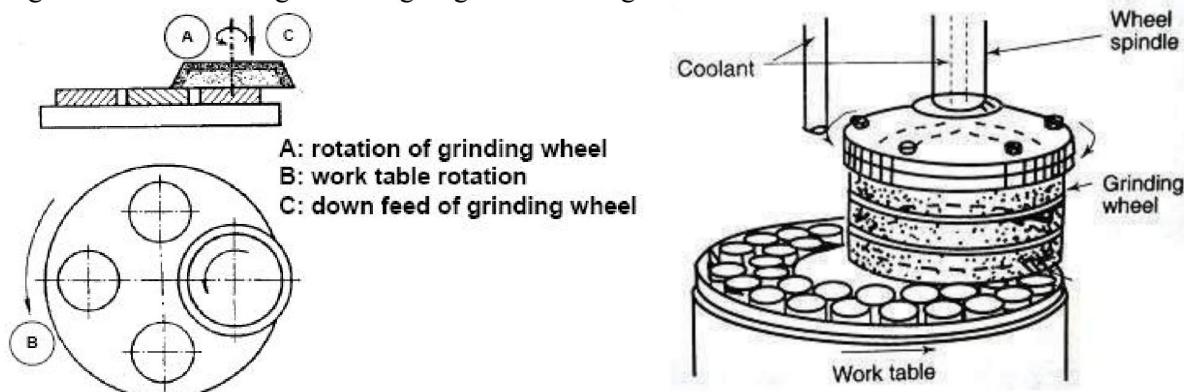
Surface grinding in vertical spindle and rotating table grinding machine
